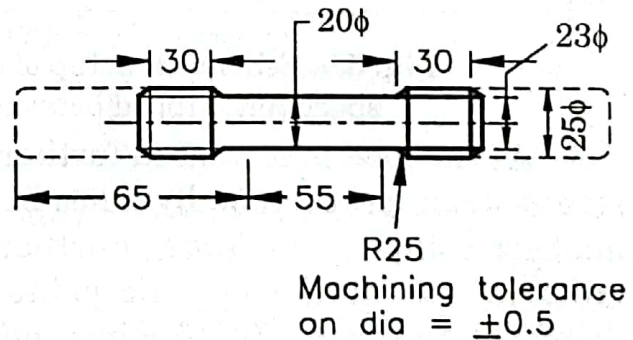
Dimensions of test bars (machined) for tensile tests.
